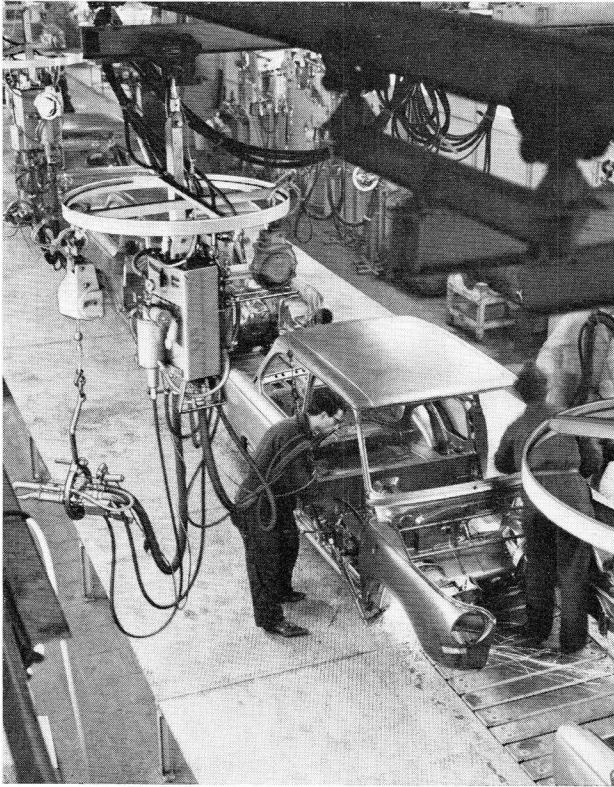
Coachwork structural parts being welded using ignitron-controlled equipment. The welding "dolly" is seen suspended on the left.
